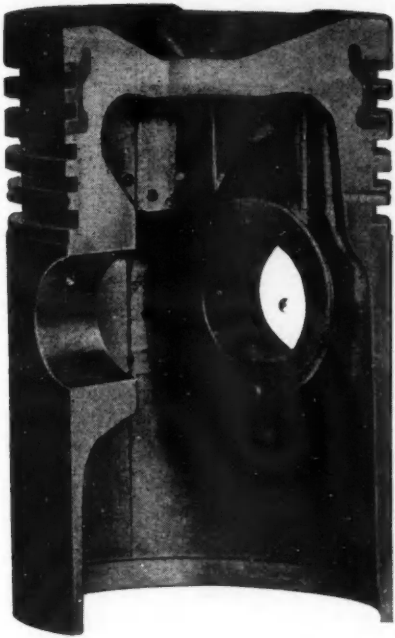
Section through Elektronmetall piston with ring carrier of alloy cast iron
